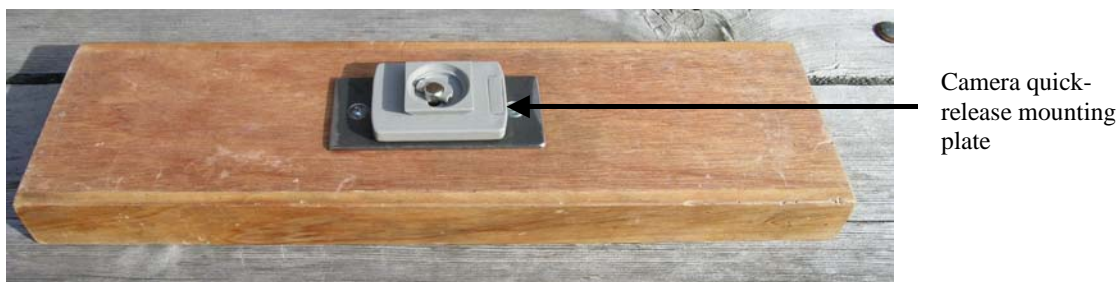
1.6. Bottom side of the laser assembly mounting frame showing the tripod quick-release mounting block fastened to and aligned on the mounting frame. This quick-release mount allows for easy attachment of the laser assembly in the field without tools.
